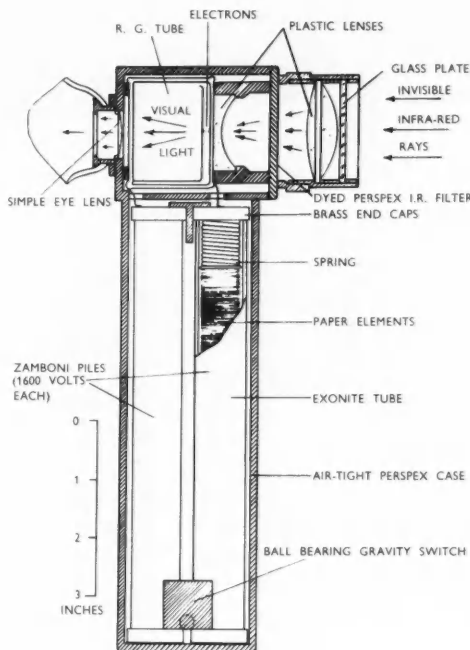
Diagrammatic section of lightweight receiver, showing assembly of lenses, infra-red tube and high-tension Zamboni battery.
